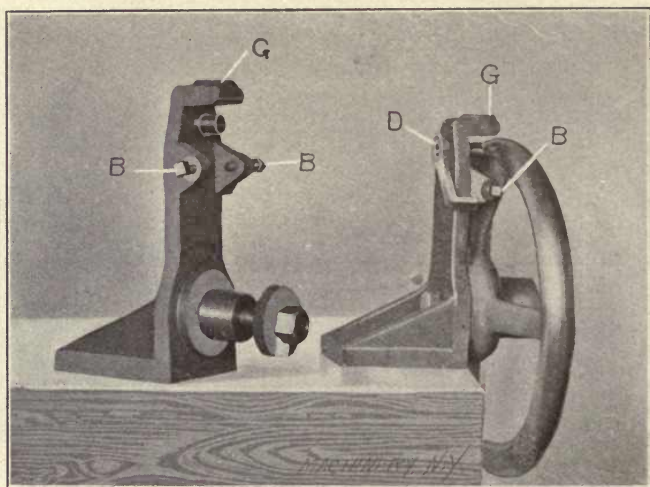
Drill Jig for Holes in Rim of Hand-wheel
